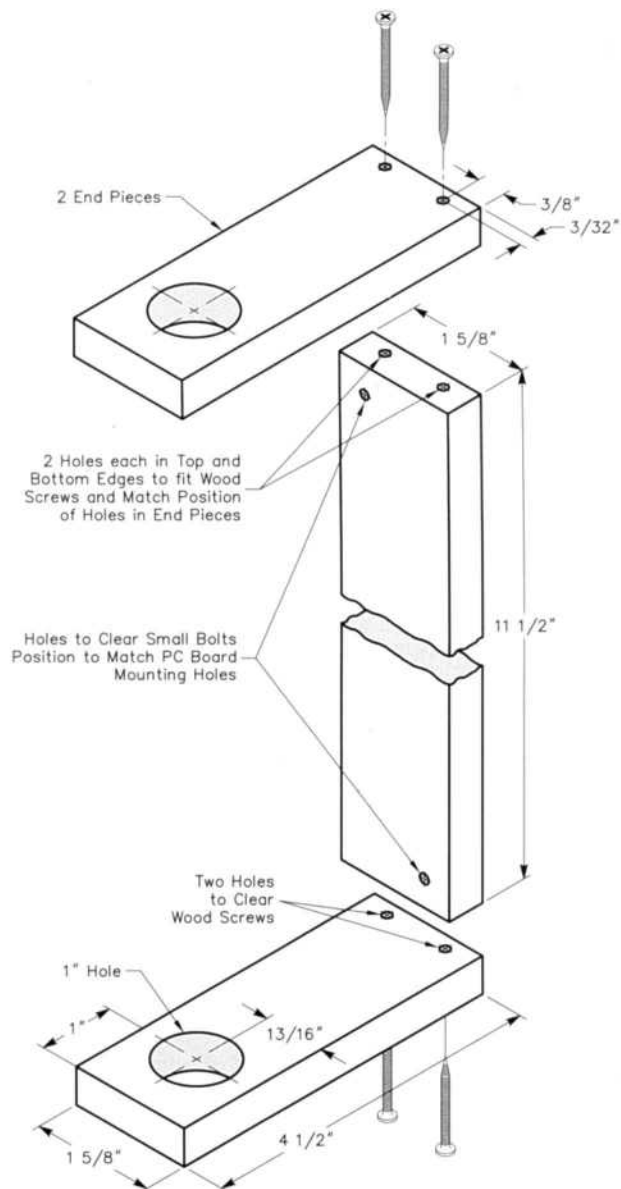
Acrylic mount parts for the Bug Catcher Bandswitch.
